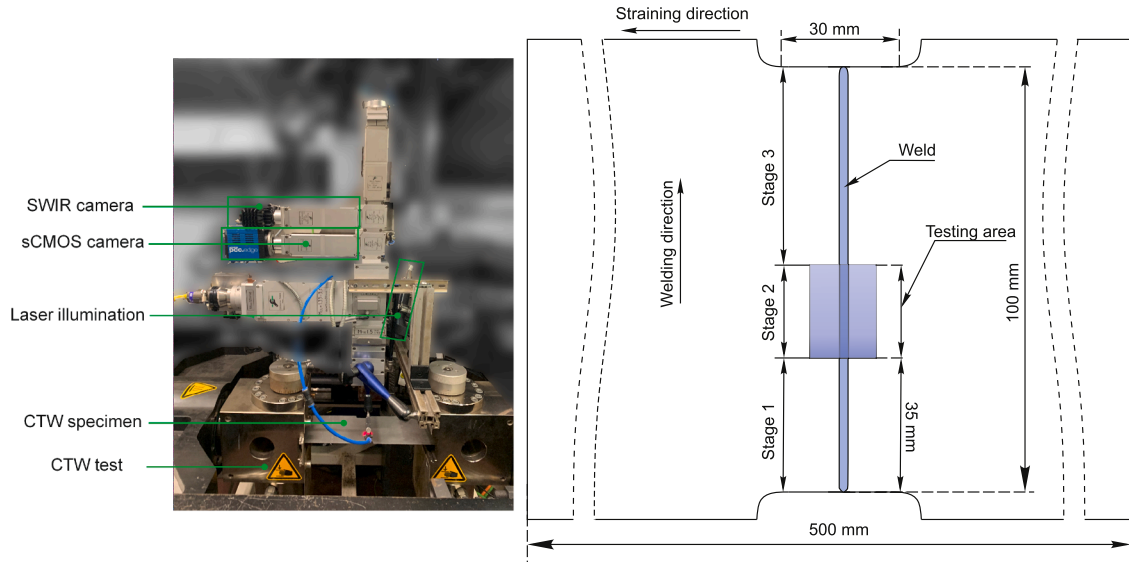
(Left) Instrumented CTW-test. (Right) Welding experiments under CTW-Test conditions-specimens arrangement.
